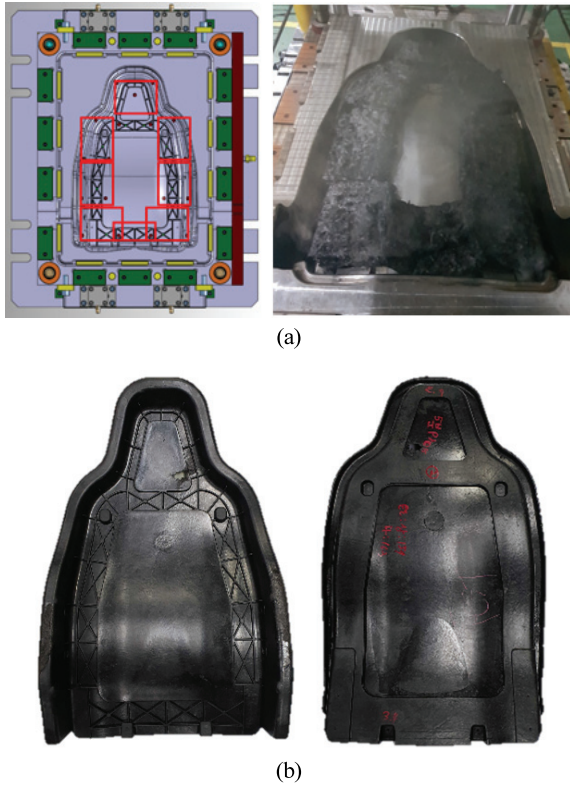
Seat-back frame molding process (a) Heating LFT prepreg material arrangement in the mold, (b) Seat-back frame compression filling molding result using LFT material
